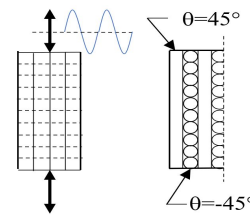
Schematic layers in printed component for a raster angle of 45°
